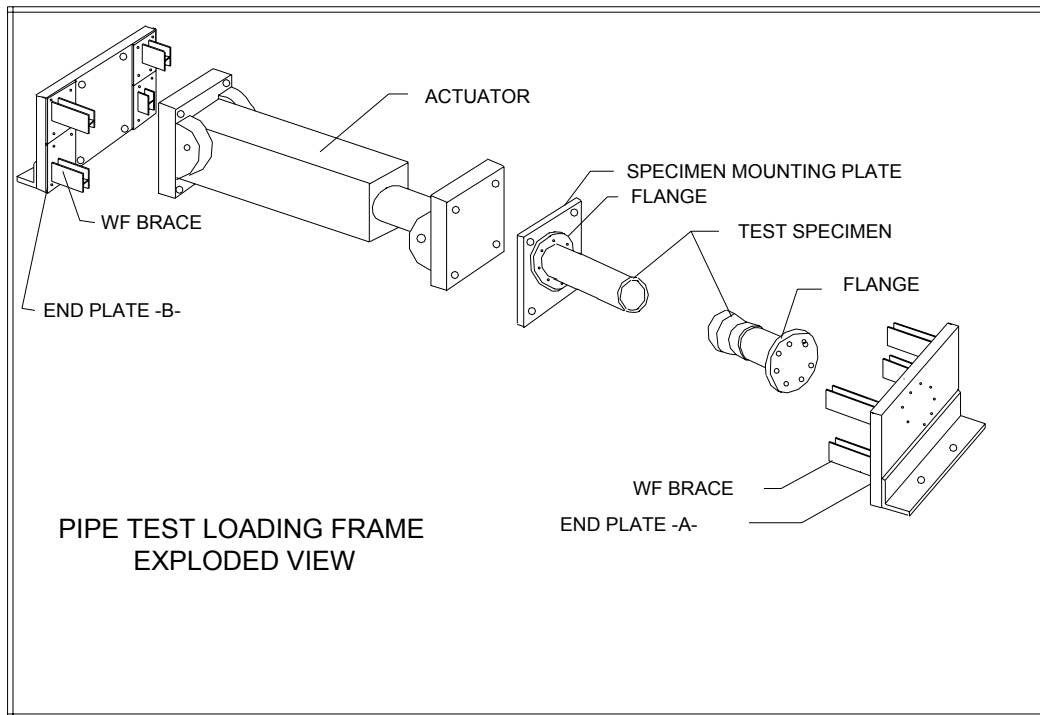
Exploded View of Actuator, Test Specimen, and Loading Frame
